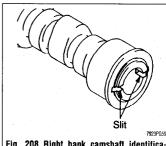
Right bank camshaft identification—3.0L SOHC engine
